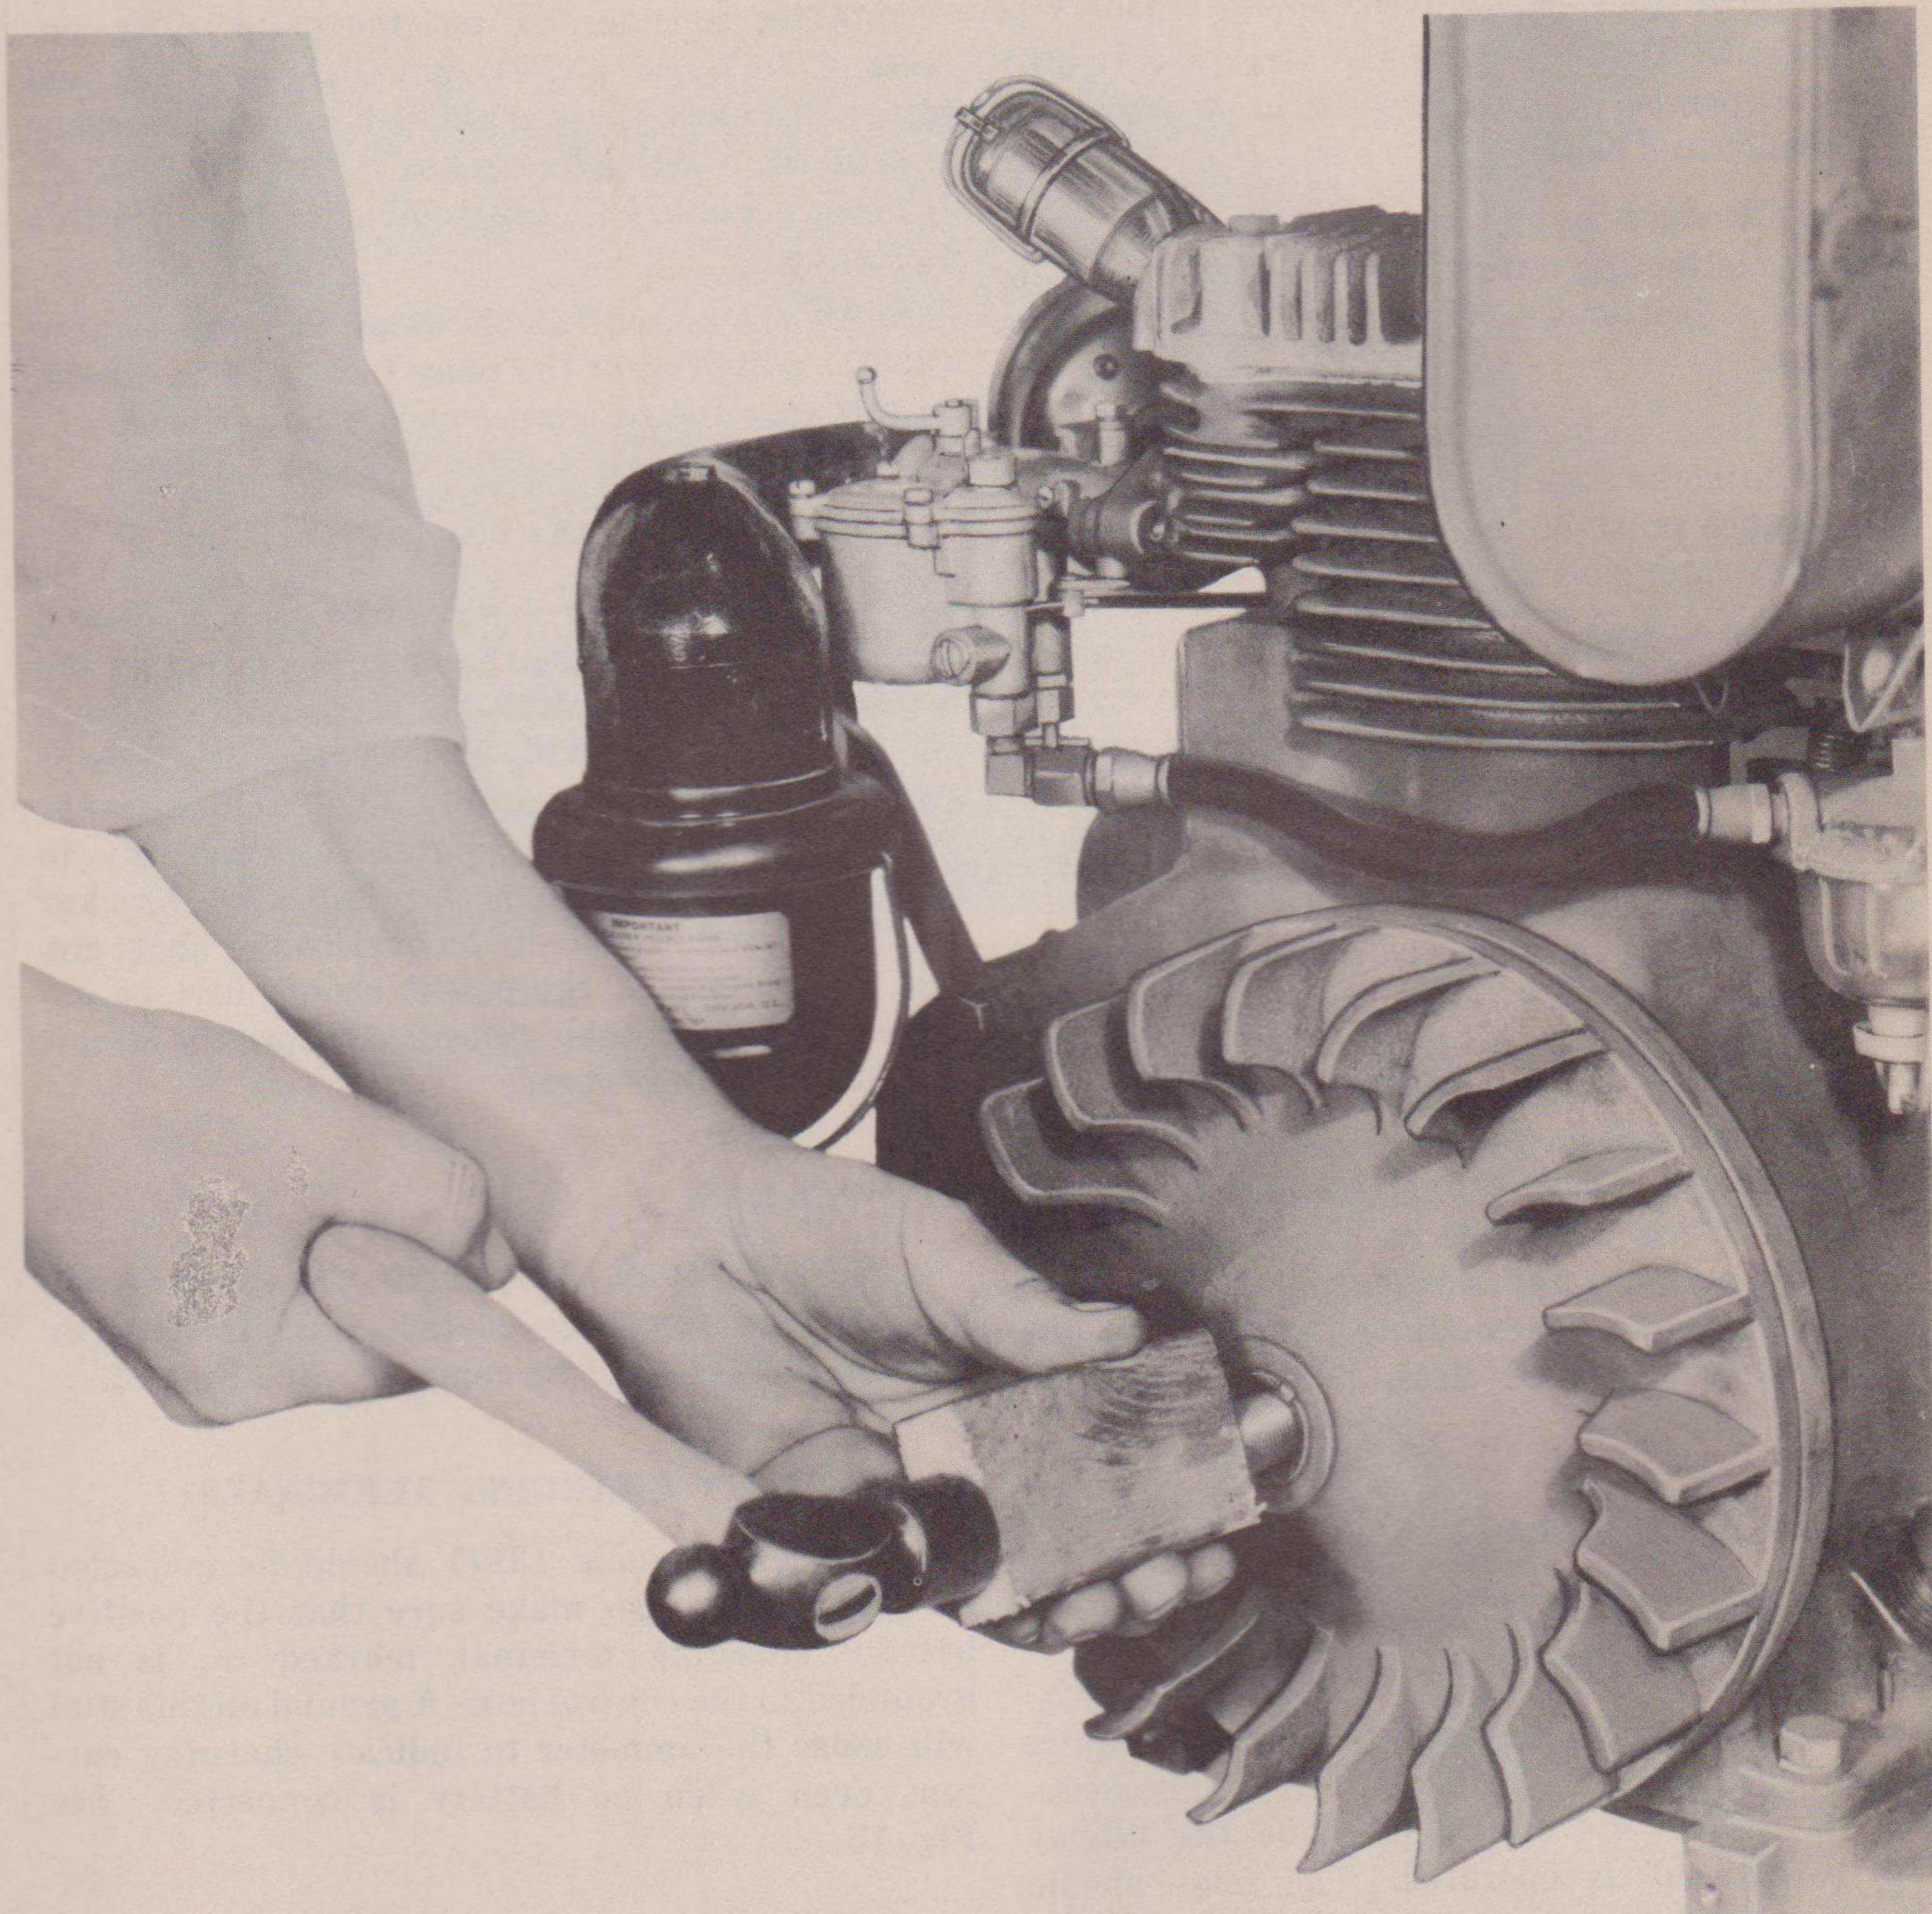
REMOVING THE ENGINE FLYWHEEL
